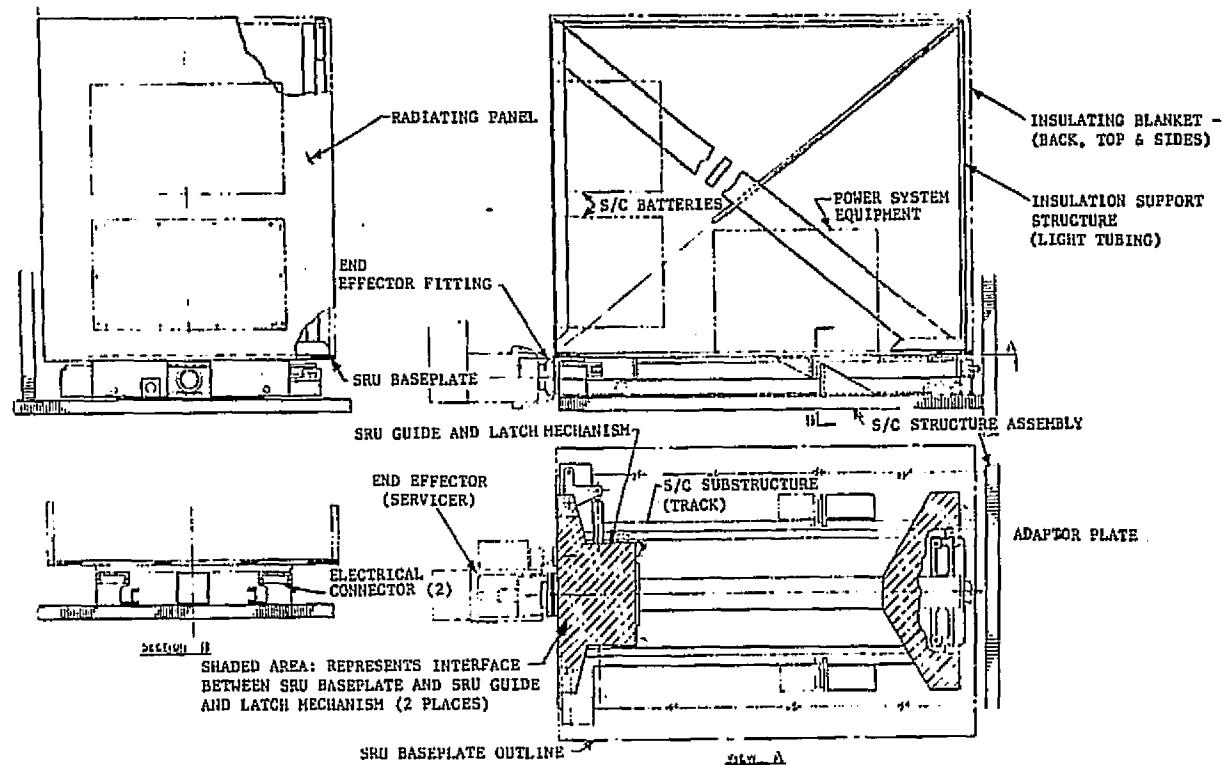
IOSS Cube Module with Side Mounting Interface Mechanism
